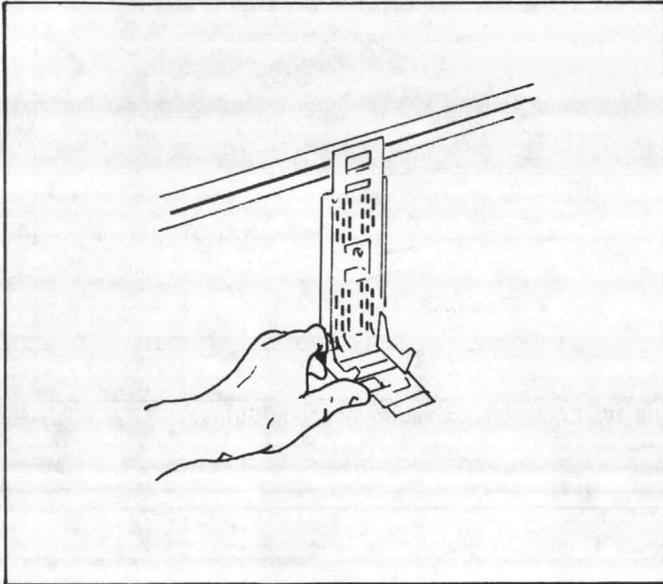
Installing the Element Cradle in Nylon Guides
